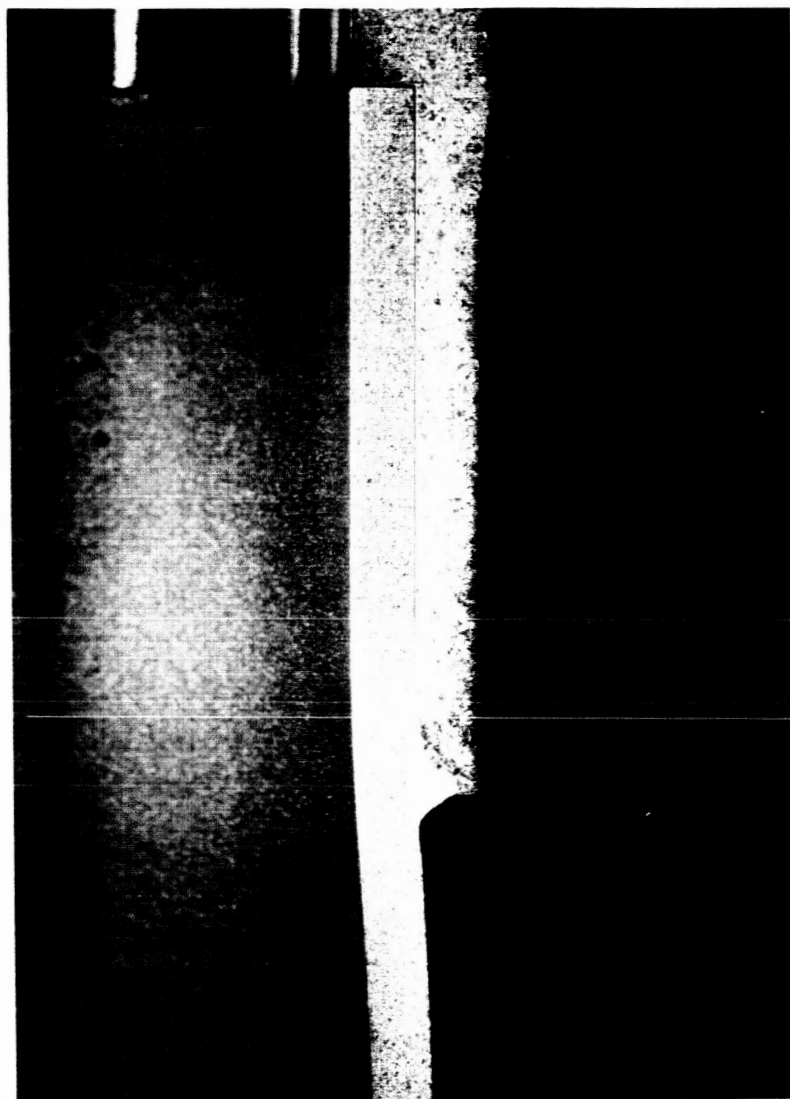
E. B. Weld test specimen after 15,000 psi pressure test.
